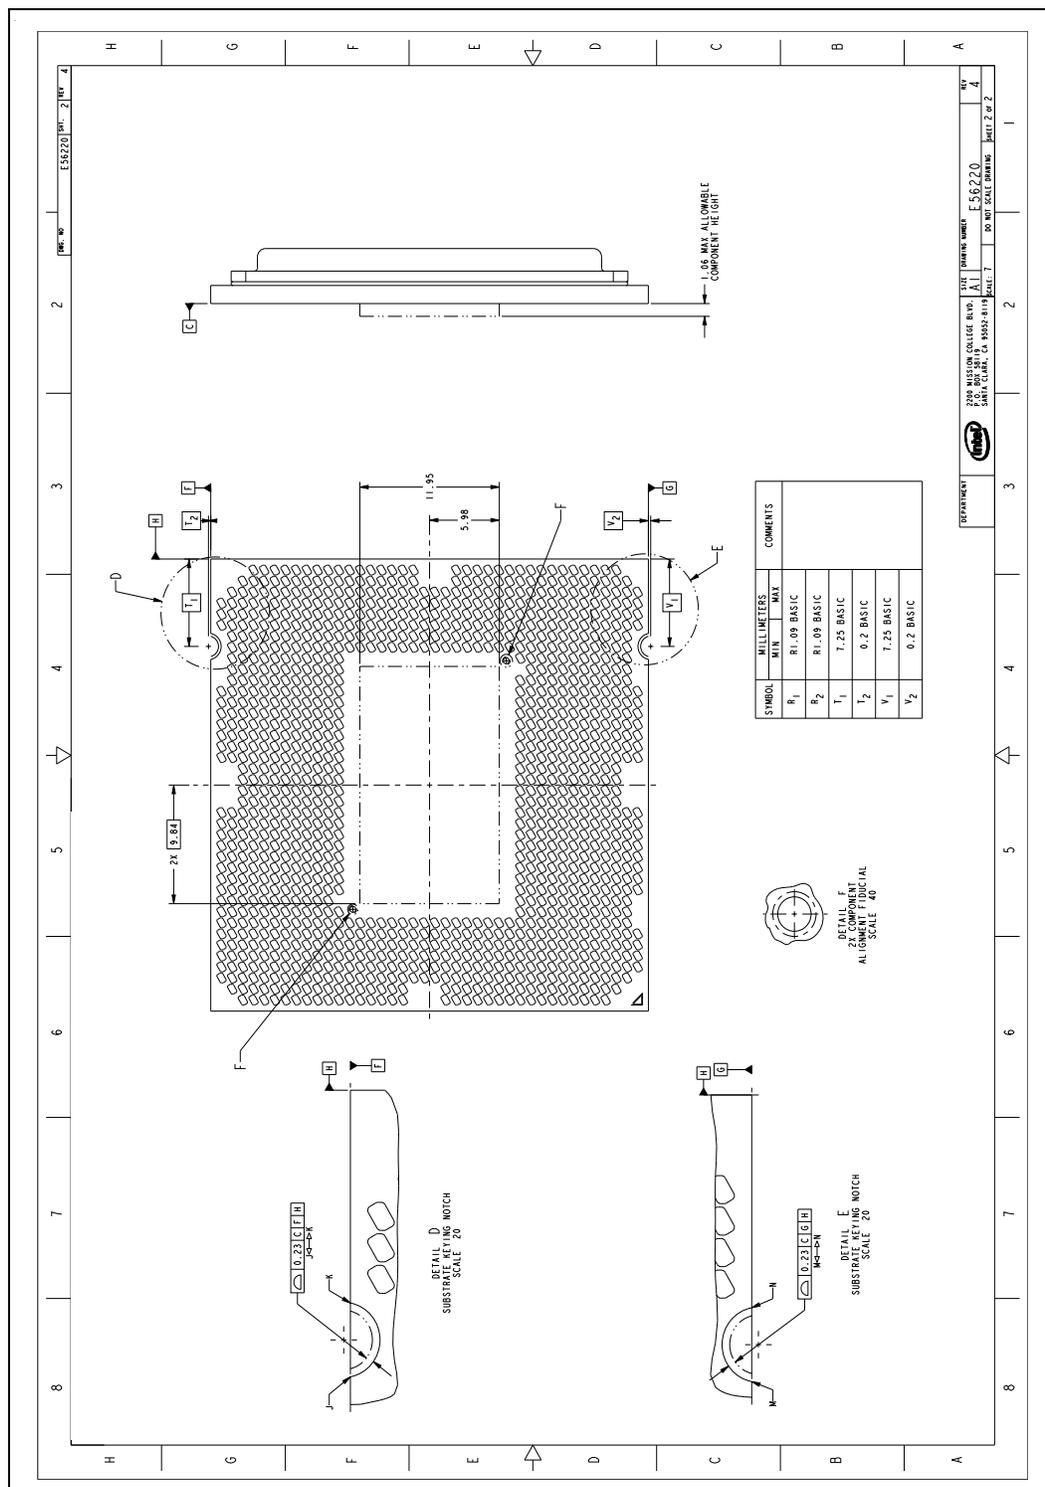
Processor Package Drawing (Sheet 2 of 2)
